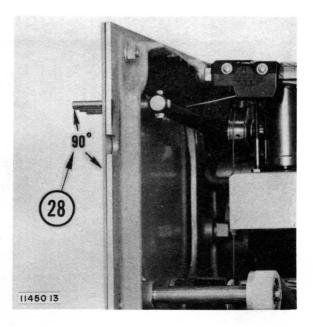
Figure 5-19e. Removing Tension Arm Mounting Assembly and Tape Guides
